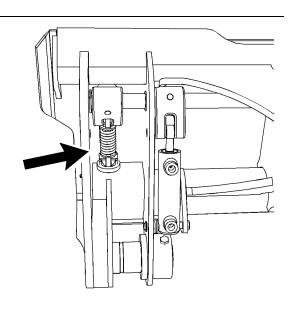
g03803509 Coupler link arm in the DISENGAGED position
